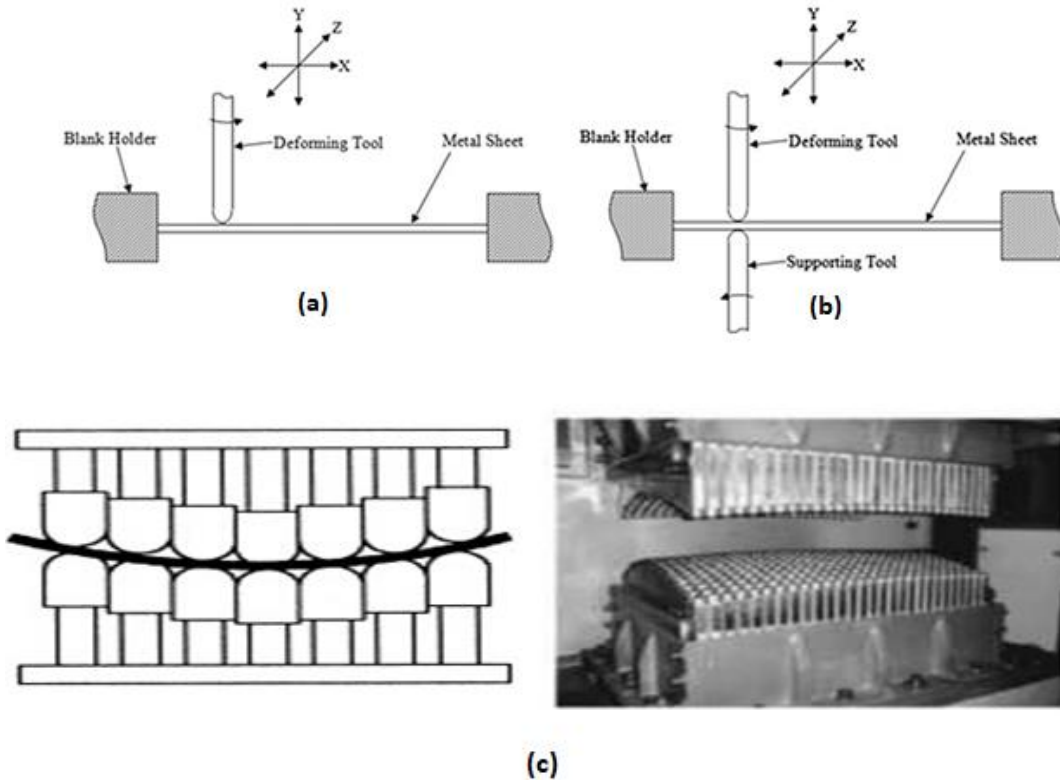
(a) shows the schematic of SPIF (b) shows the TPIF and (c) shows the multi-point incremental forming [5,8].
